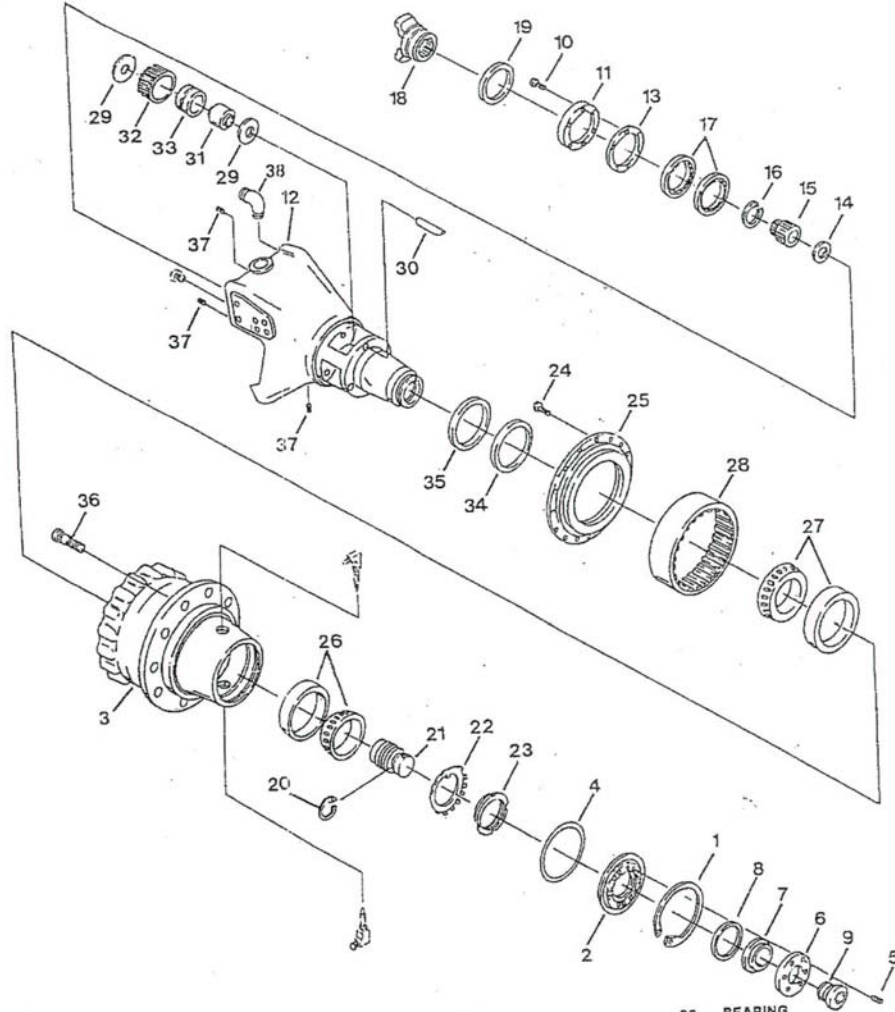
Diagram of the 8-wheel assembly on the P-23, with a hub assembly location shown.
